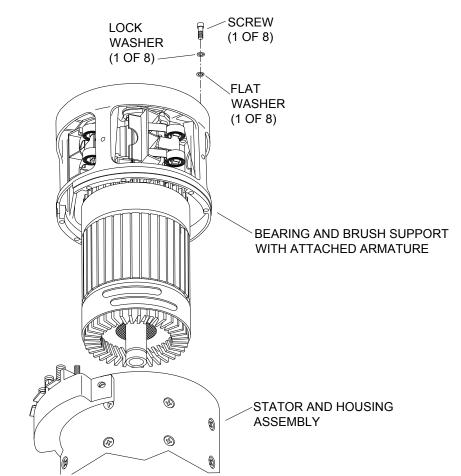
Attach Bearing and Brush Support Assembly with attached Armature
